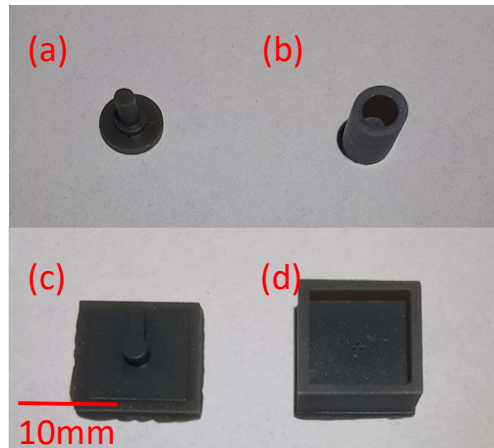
3D printed molds. (a,b) The 3D printed molds for cylindrical device (c,d) 3D printed mold for the square-shaped device.
